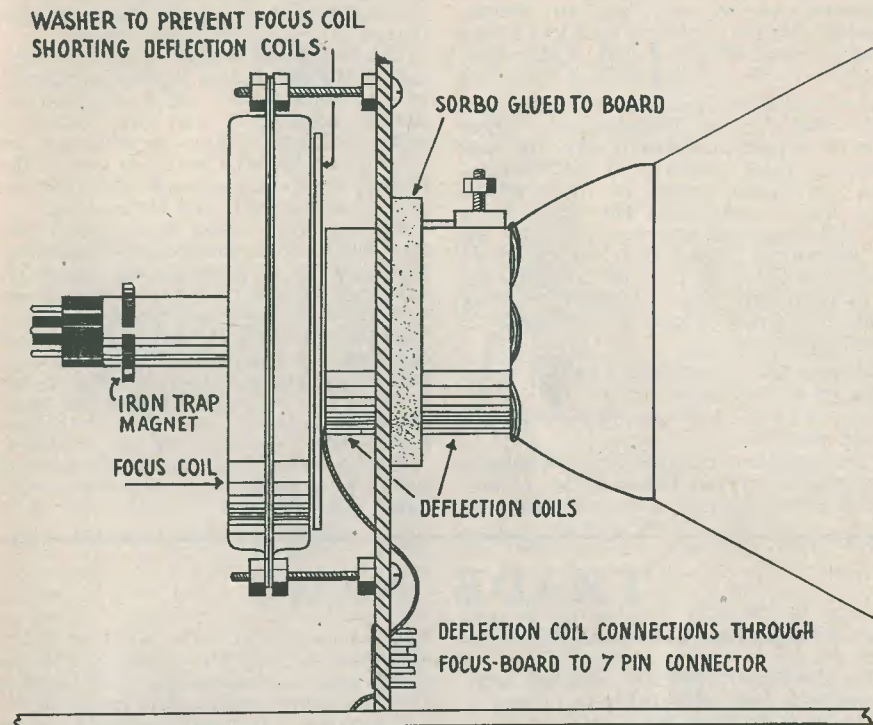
IMPROVED VERSION OF REAR FOCUS BOARD
